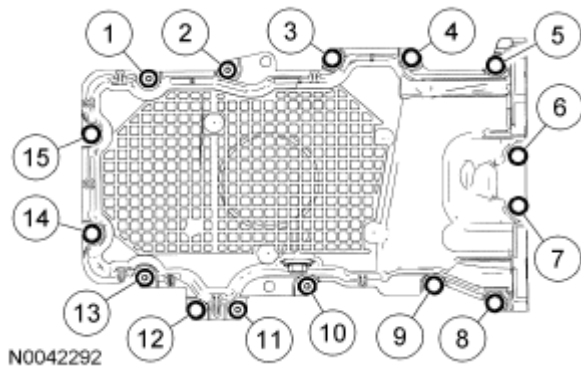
Locating Tighten Sequence Of Oil Pan-To-Engine Bolts
